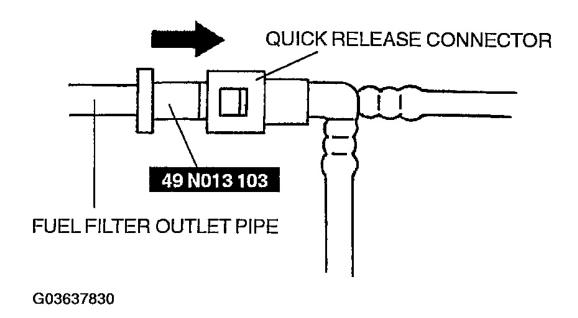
Disconnecting Fuel Pipe Courtesy of MAZDA MOTORS CORP.
